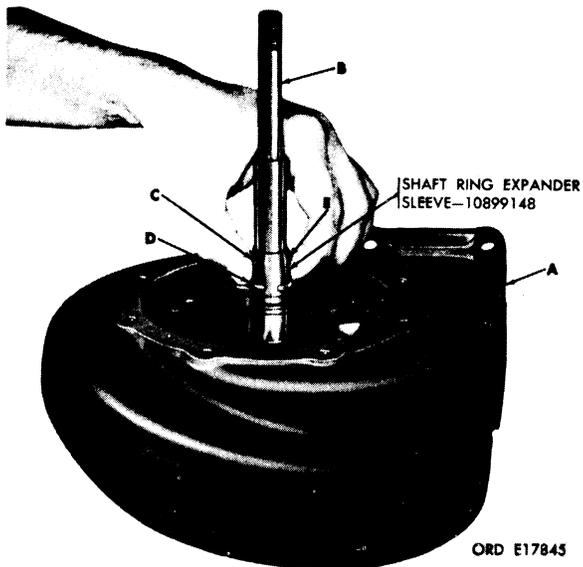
INSTALLING SHAFT AND TURBINE WHEEL AND PISTON RINGS ON TURBINE HOUSING.
